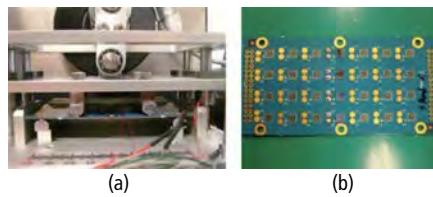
Pictures of (a) 4-point cyclic bending test machine, (b) bending test board which has 4 WLPs
